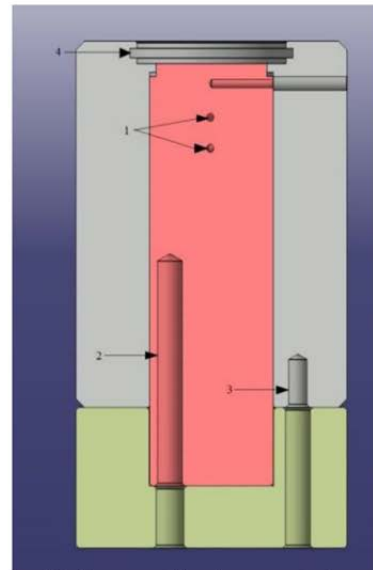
The assembled heater and insulator set: 1- thermocouples place, 2- cartridge elements, 3- bolts, 4- oring groove
